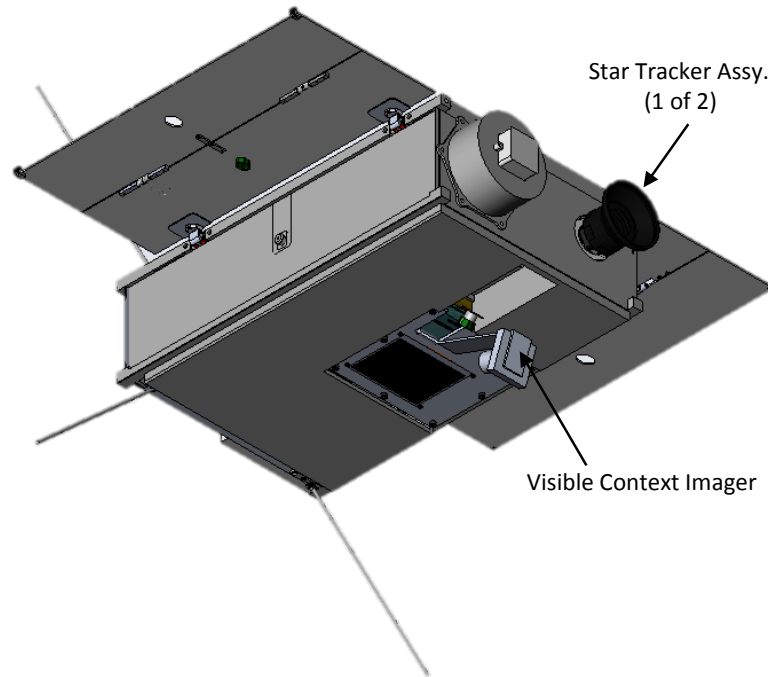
Arkyd 6 Spacecraft, Aft Side View
